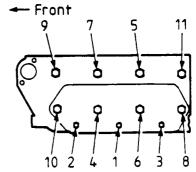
Cylinder Head Bolts Tightening Sequence 10mm dia bolts 7-8 kgm (50.6-57.8 ft lbs)
